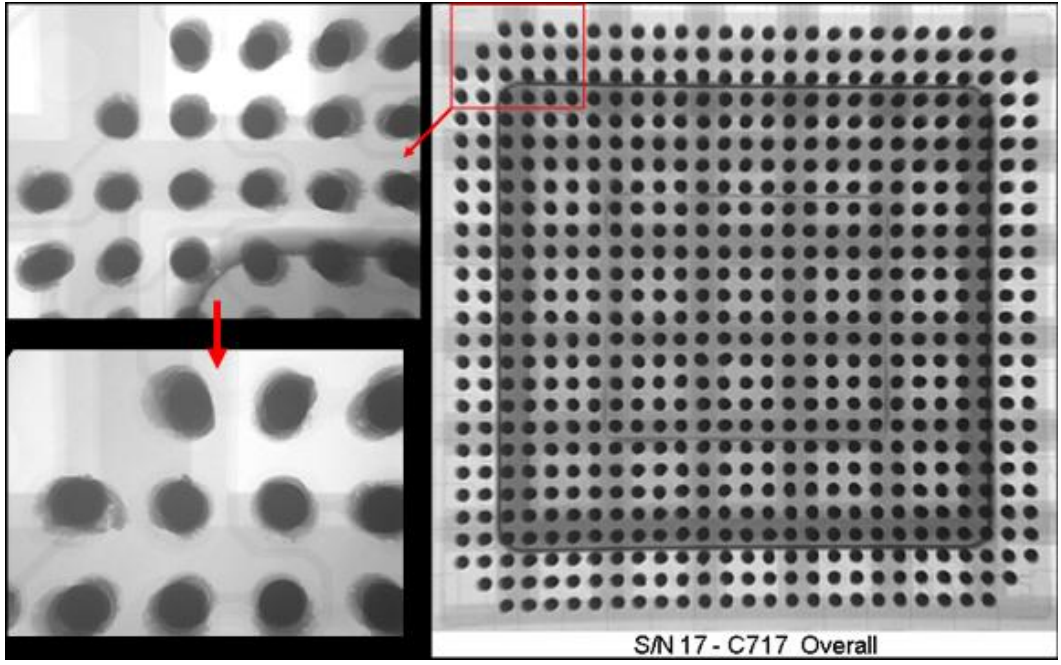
X-ray photographs of CGA 717 I/O assembly with NSMD pad design after thermal cycling.
